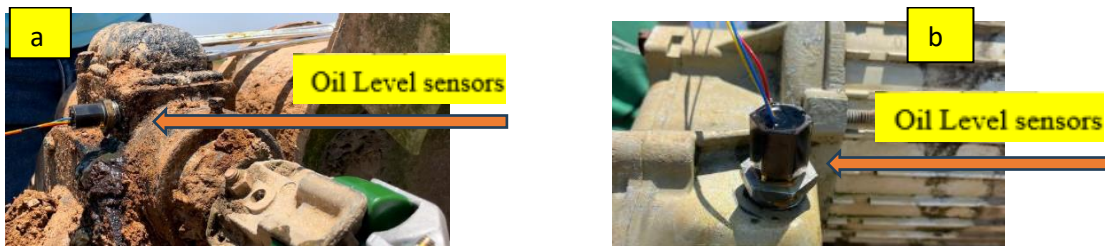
a- The oil level sensor of gear box installation, b-The oil level sensor of gear motor installation.
